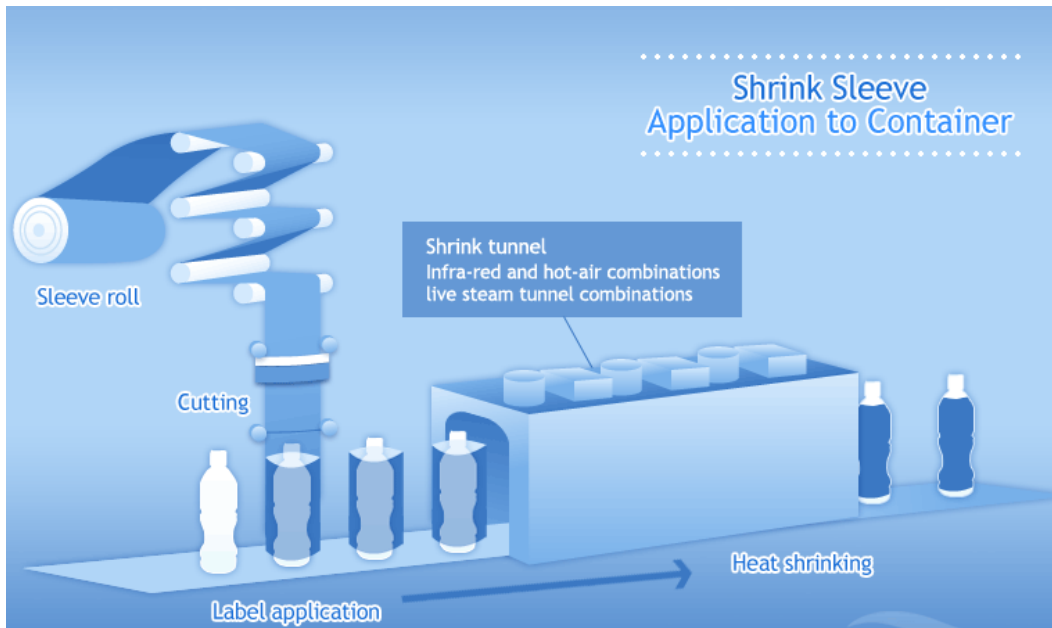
Sleeves application using heat tunnel for label shrinkage.
